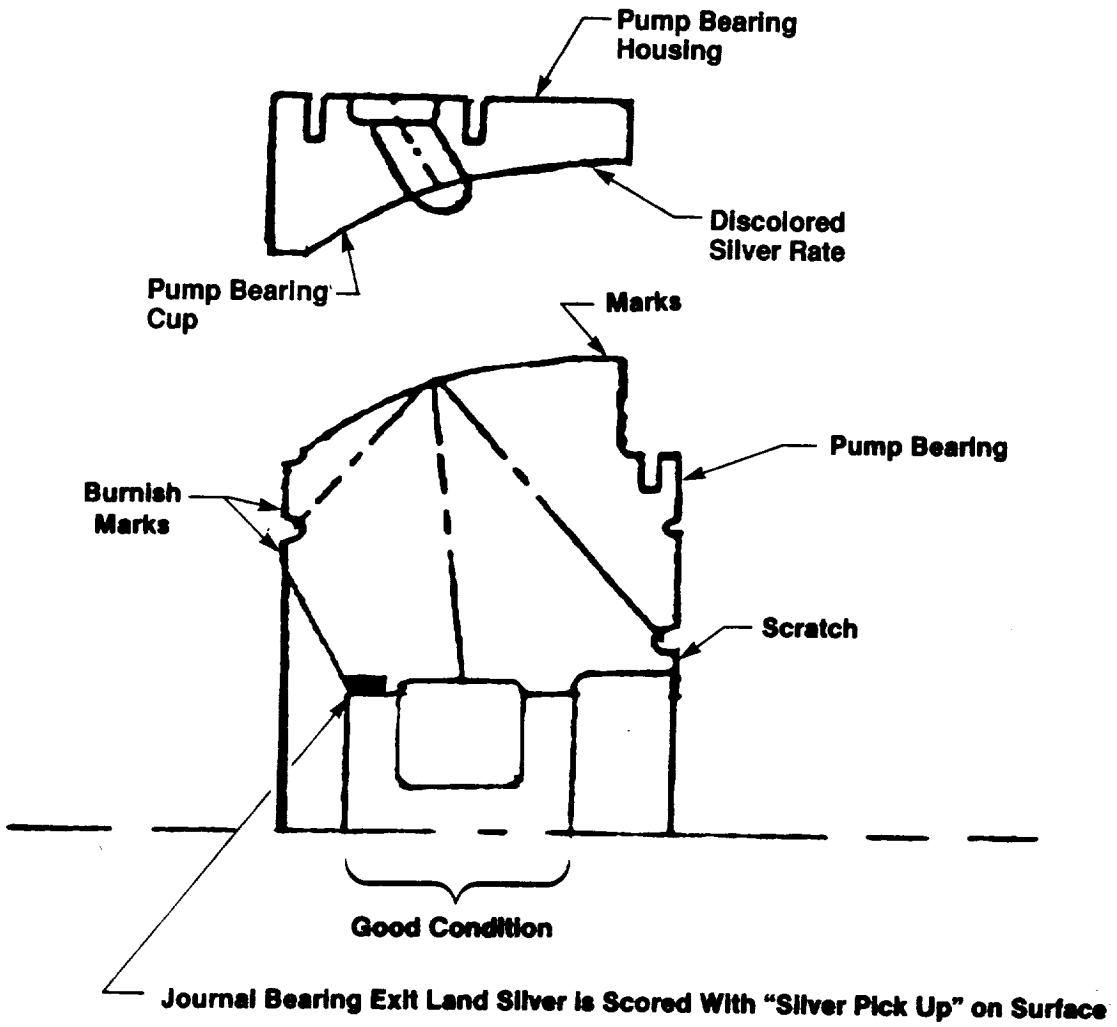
Contact Locations on Pump Bearing Assembly
